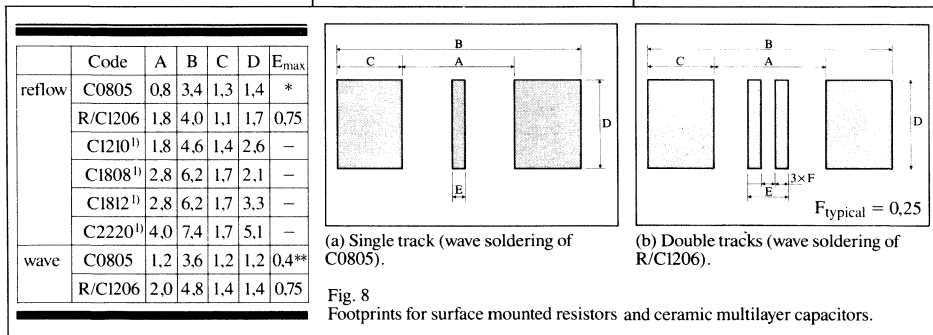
to 16 show footprints (in mm) for most SMD packages. All dimensions given are based on the criteria discussed in these guidelines, and from our experience with both development and production circuit boards. They are reproduced for guidance only.
